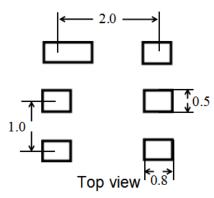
Recommend WHT 20 PCB design size (unit: mm)
